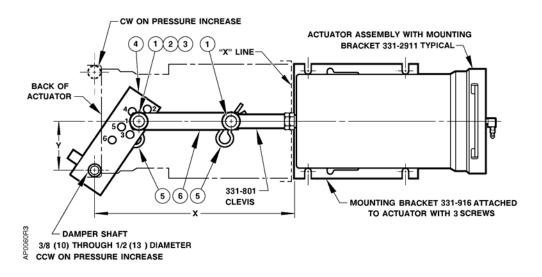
Fixed Mounted Actuator Assembly. Dimensions in Inches (Millimeters).
